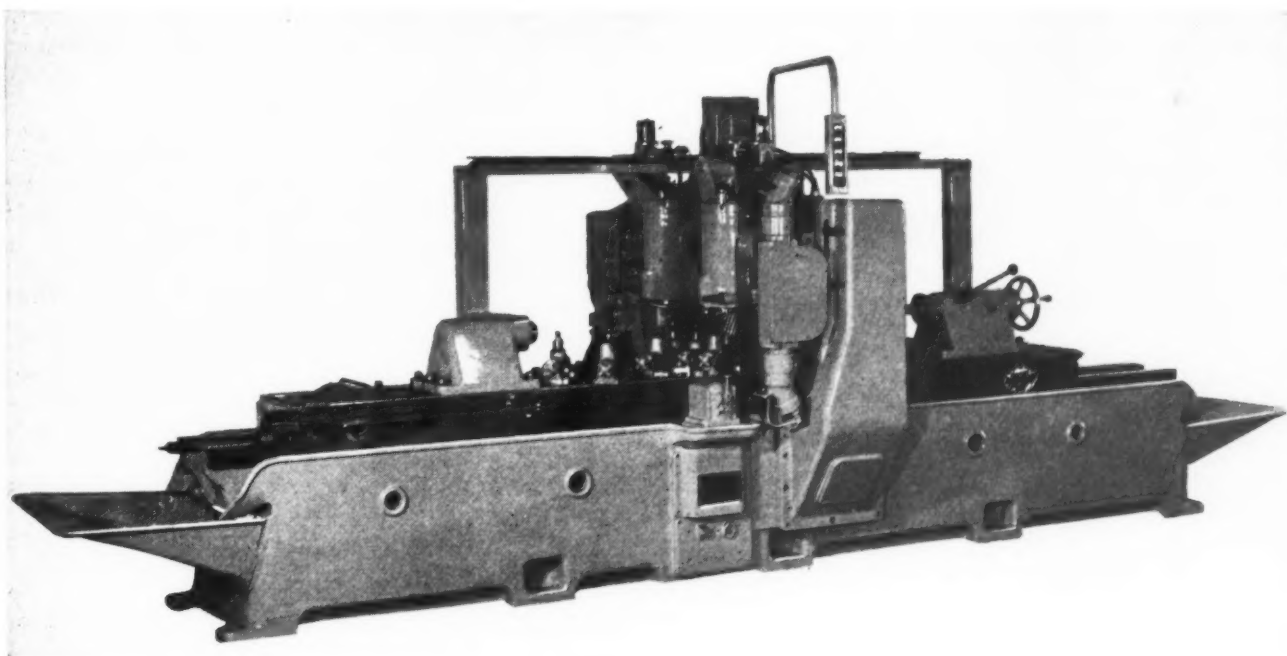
Propeller-edge Milling Machine Designed and Built by the Sundstrand Machine Tool Co.
